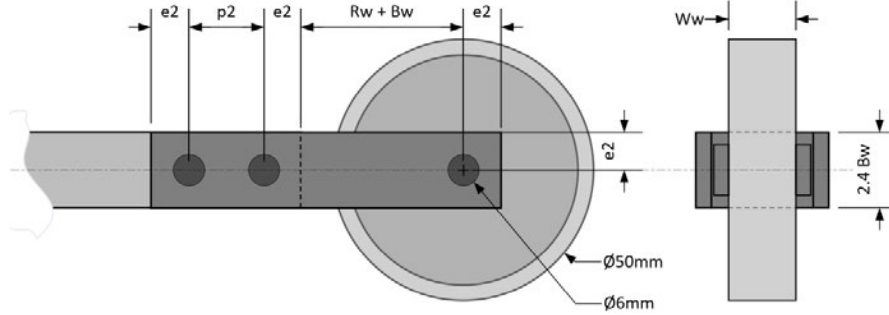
Wheel-Yoke-Arm Detail Drawing - 25mm Radius Wheel - 6mm Diameter Wheel Bore
